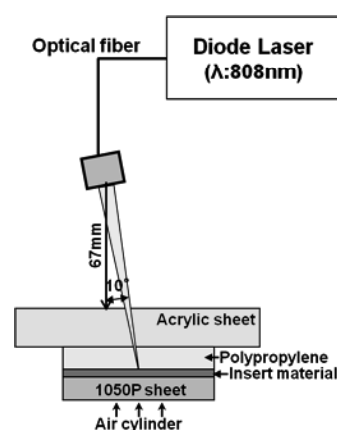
Schematic drawing of experimental set-up of laser joining.
